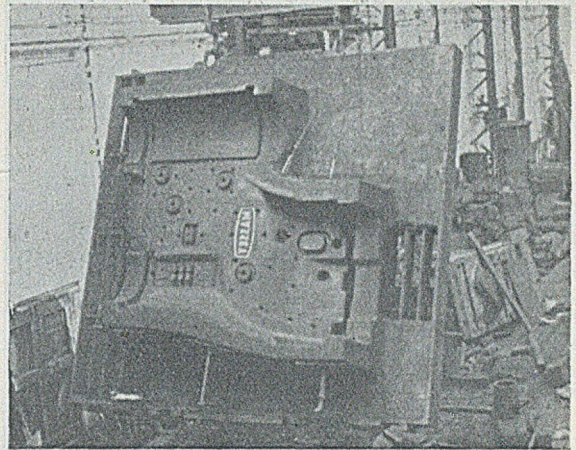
Top-part of the Cylinder Mould being Turned Over, Ready for Drying.
